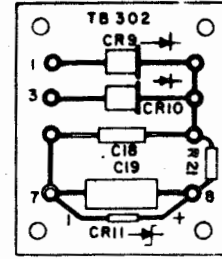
Terminal Board - 3.9 Volt Assy Wired TB-302
